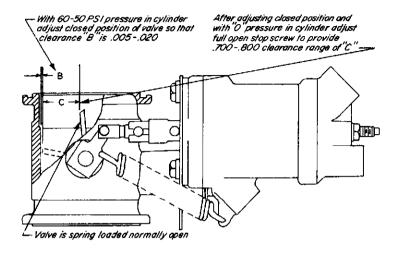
Exhaust Bypass Valve Open and Closed Setting
